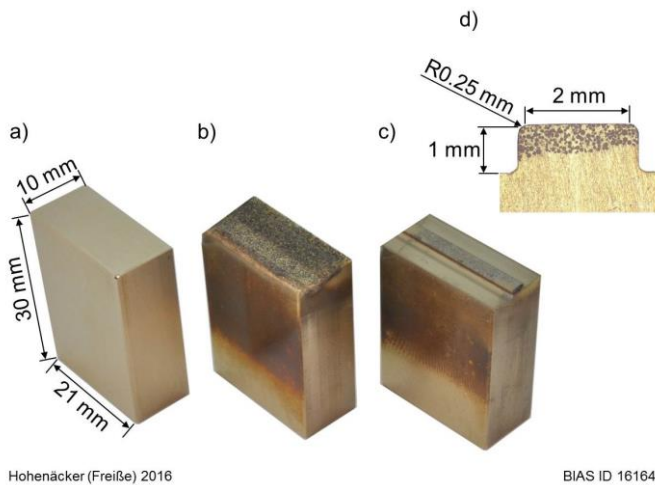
Laser generated MMC surface on a strip drawing jaw. a) dimensions of the strip drawing jaw substrate, b) laser dispersed surface, c) finished eroded shape shown in overview and d) in metallographic cross section
